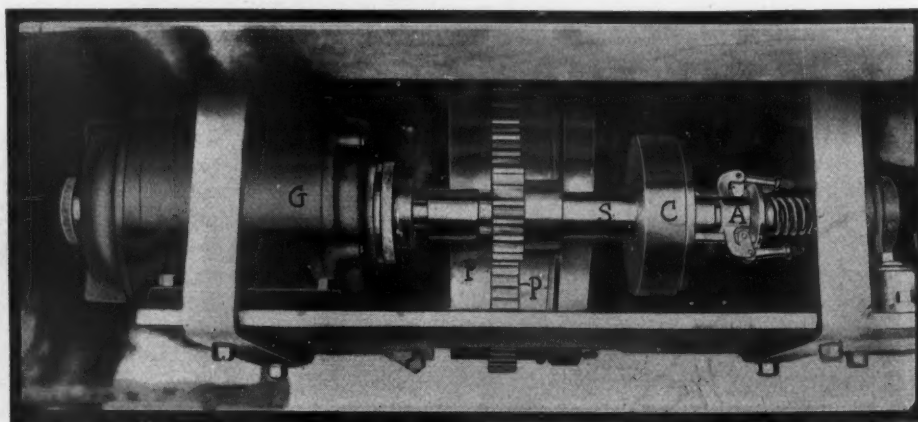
O'NEILL SELF-STARTER ON METAL BASE BOARD OR MOTOR
